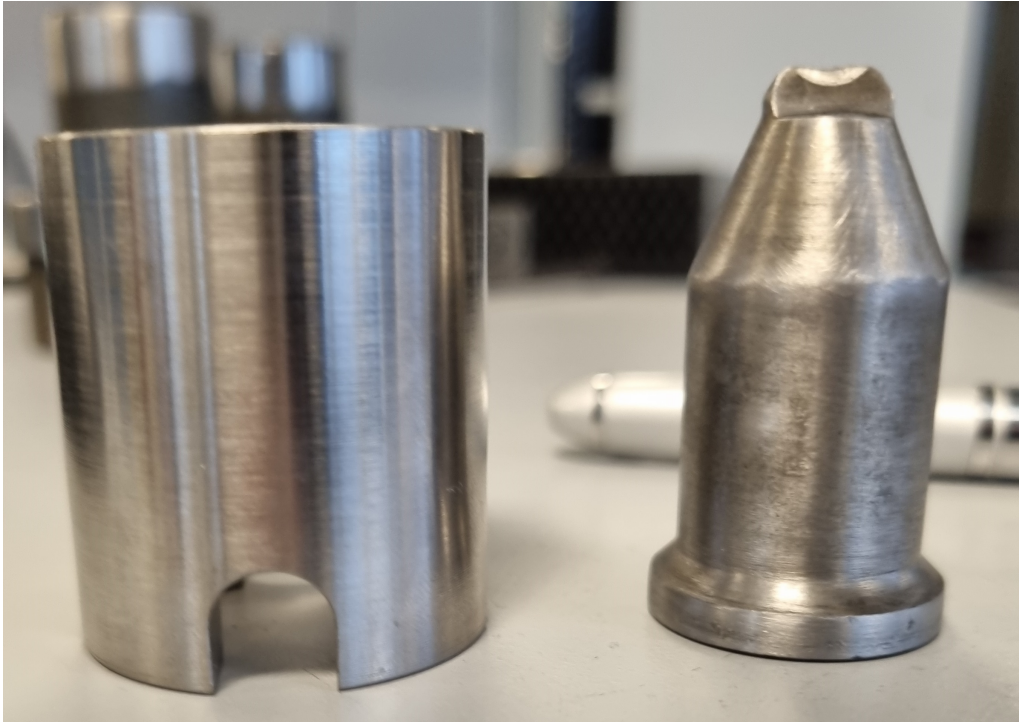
Notching tool, holder on the left with indent tool on the right.
